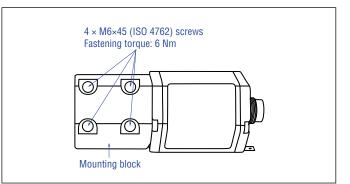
Mounting of RDV's sensor electronics housing (example of bottom cable entry)
